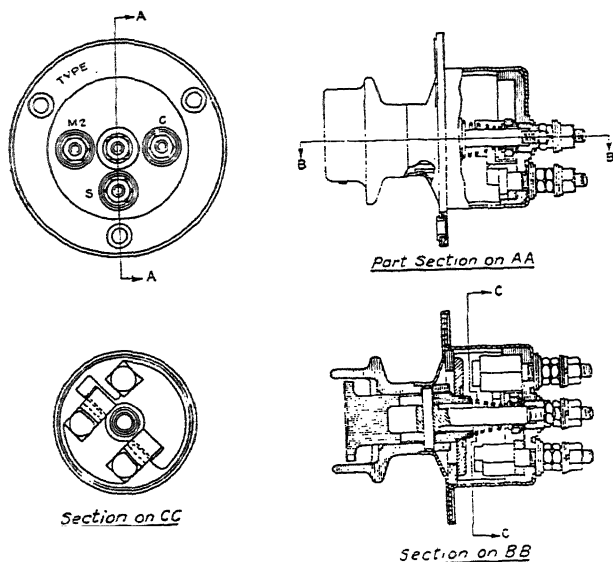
SECTIONAL VIEW OF B.T.H. SWITCH TYPE N.
